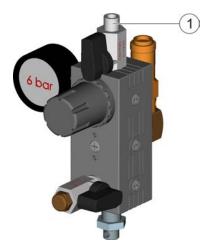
Compressed air inlet fitting (standard, 1 pressure controller)
